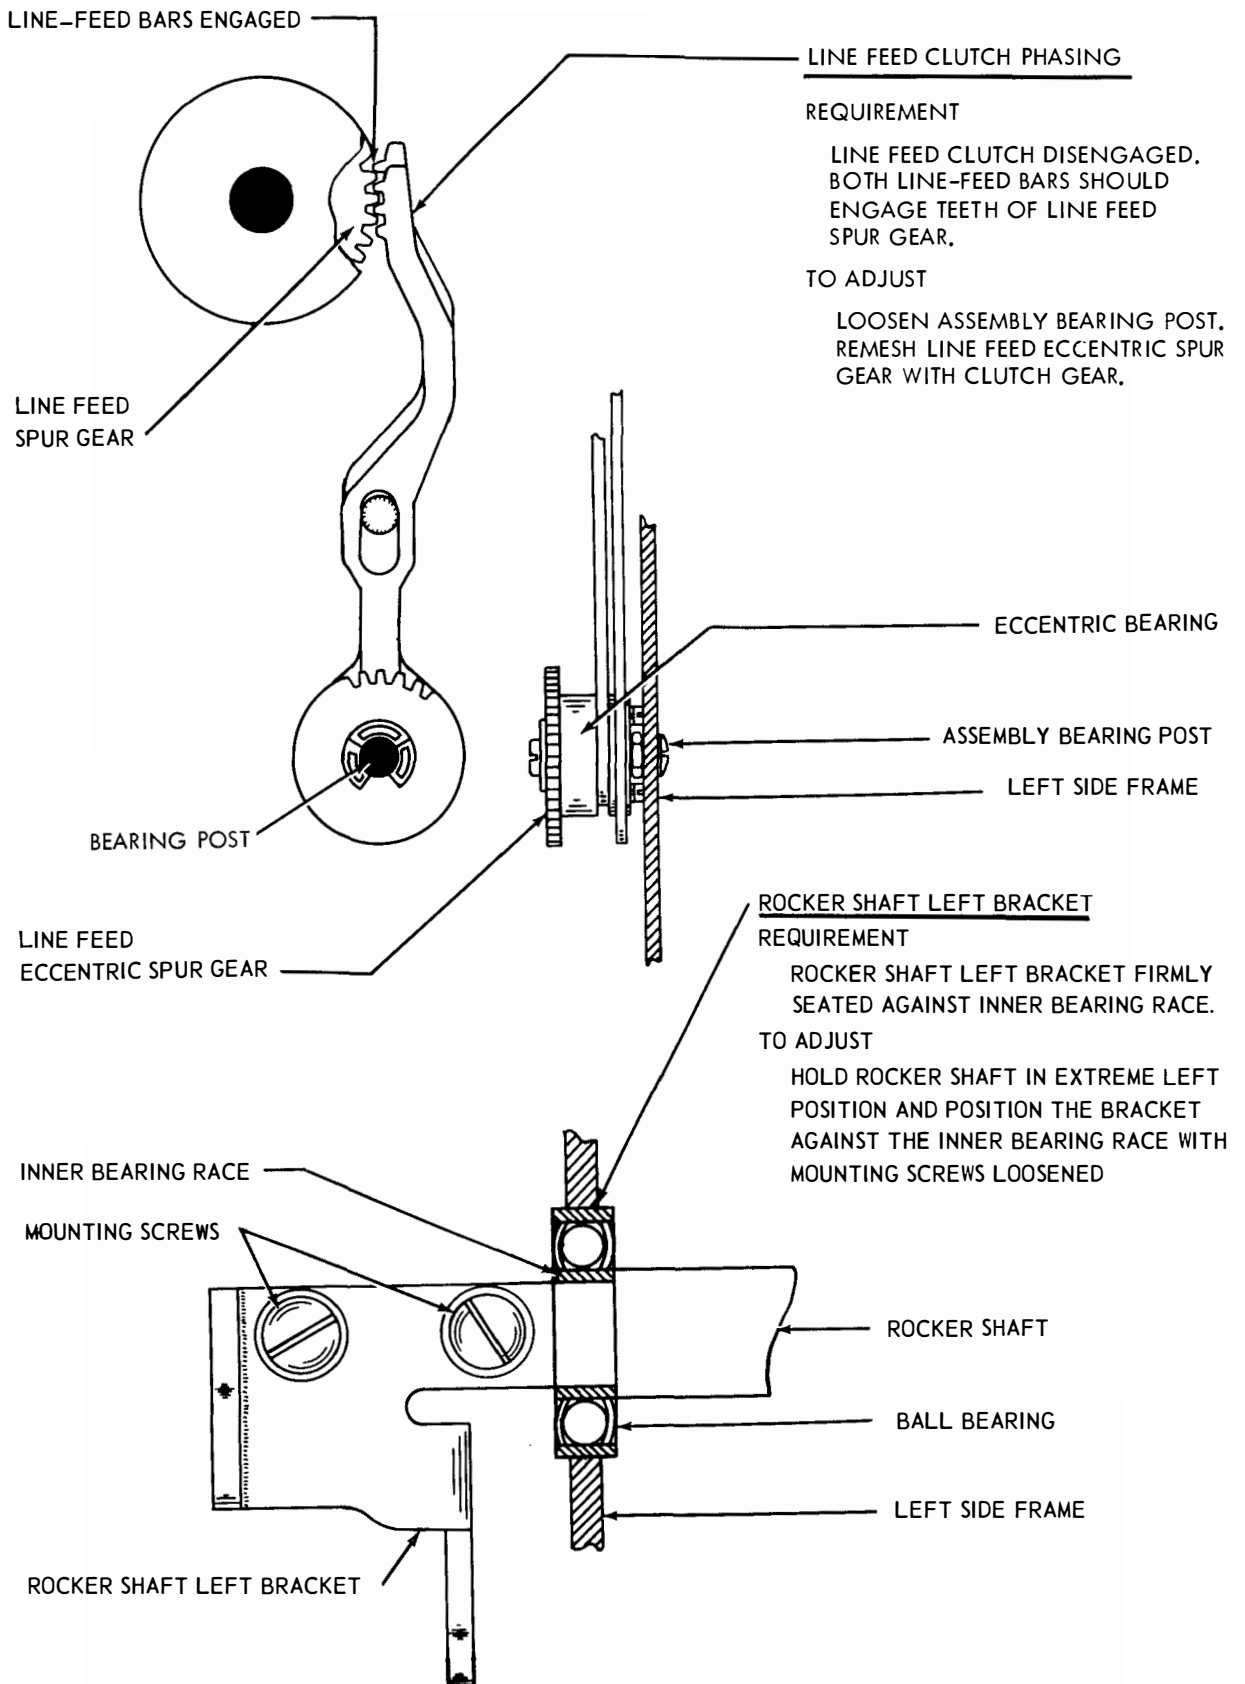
Automatic Typewriter, Line Feed and Rocker Shaft Mechanisms
